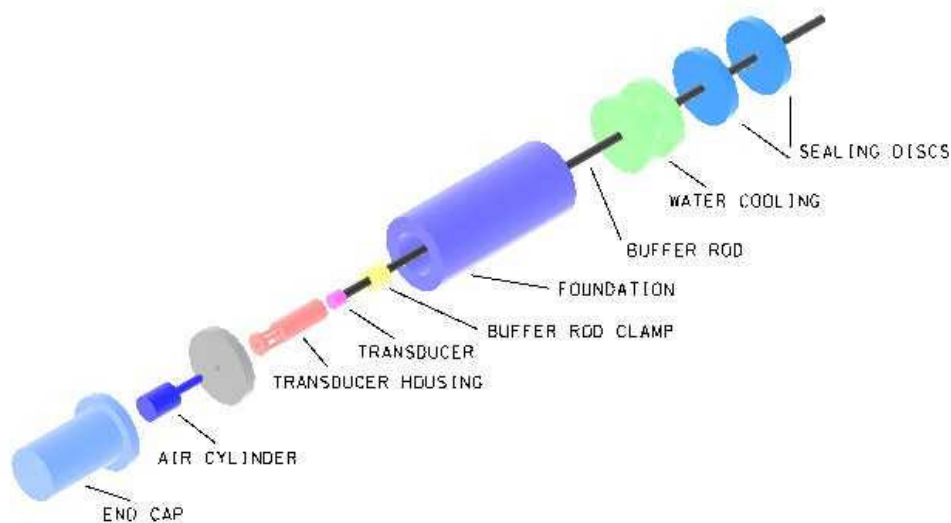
An exploded view shows the end cap and frame for housing the transducer, air cylinder, and buffer rod. The cooling system is also shown.
